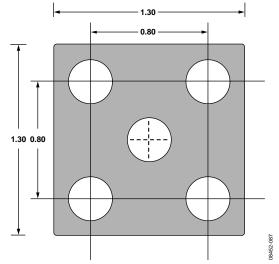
Recommended PCB Thermal Attach Pad Dimensions (mm)
